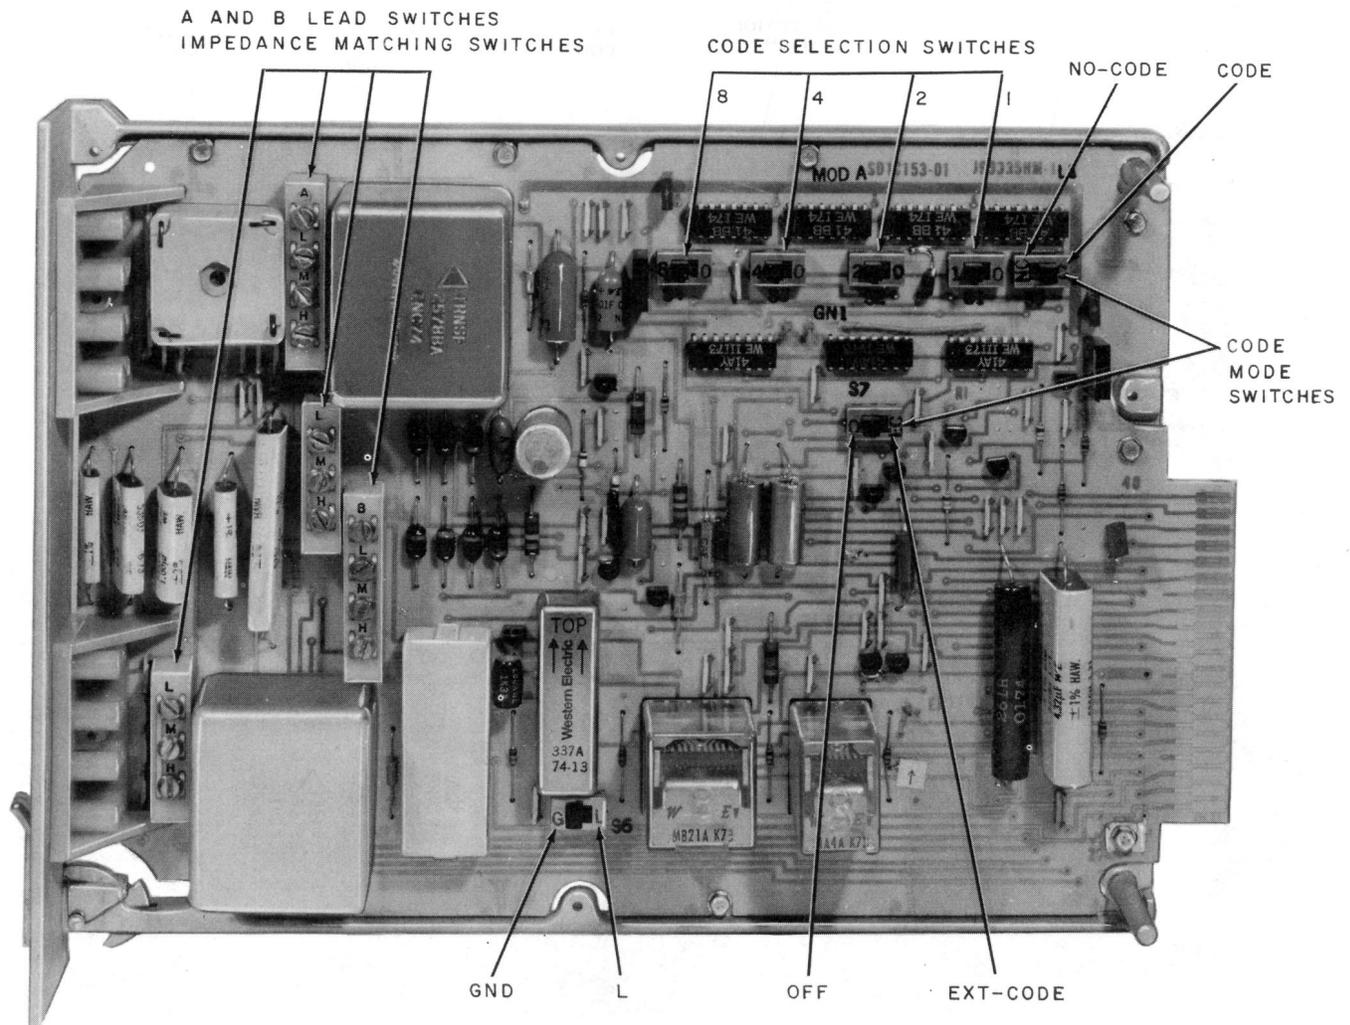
FHM PC Assembly Showing Coding and Impedance Matching Switches
